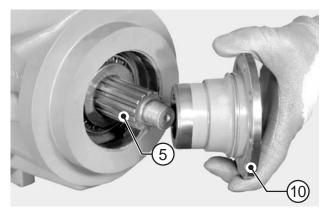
Install the flange (10) onto the pinion (5) without the sealing ring.
